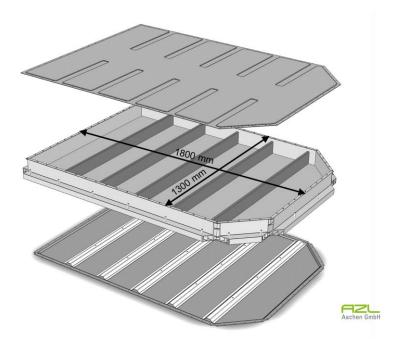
Aluminum reference component, welded box structure, bottom protection plate and lid.
